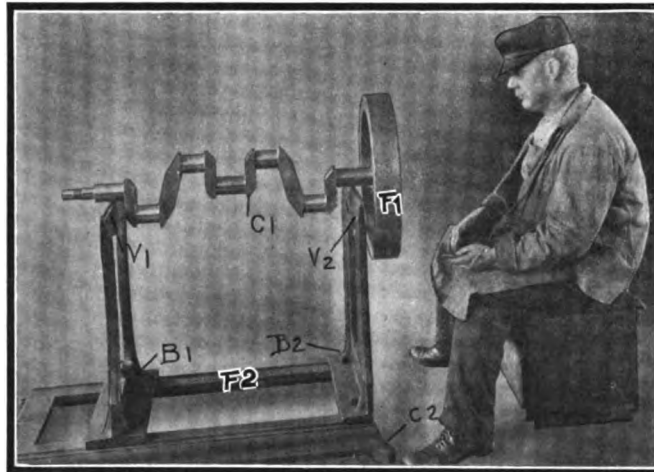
Method of determining the static balance of a crankshaft after the flywheel is pressed on
